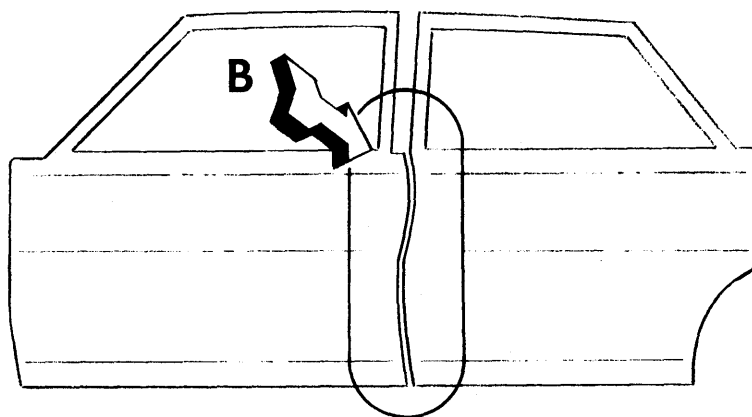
Specified Body Opening Clearance Tolerances - "A" Styles
